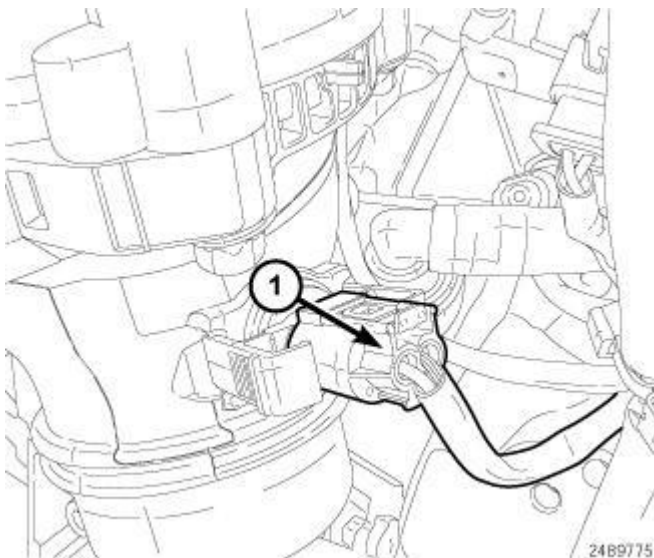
Mixing Chamber & Wire Harness Retainer Clips
